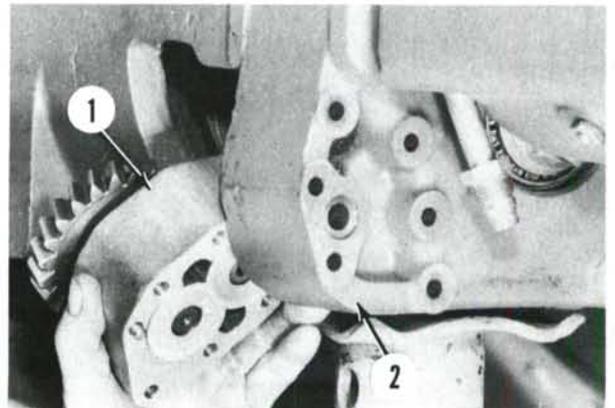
Power shift hydraulic pump (1) is mounted on lower right corner of range gearbox cover (2). Hydraulic manifold mounts on front side of the cover.
